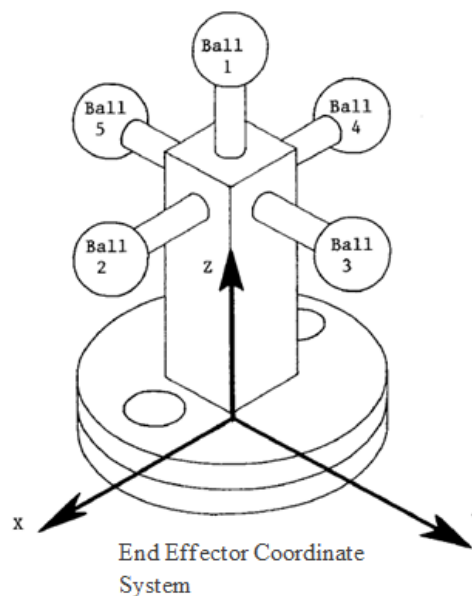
Five tooling ball fixture used by [30] to extract the full robot pose
